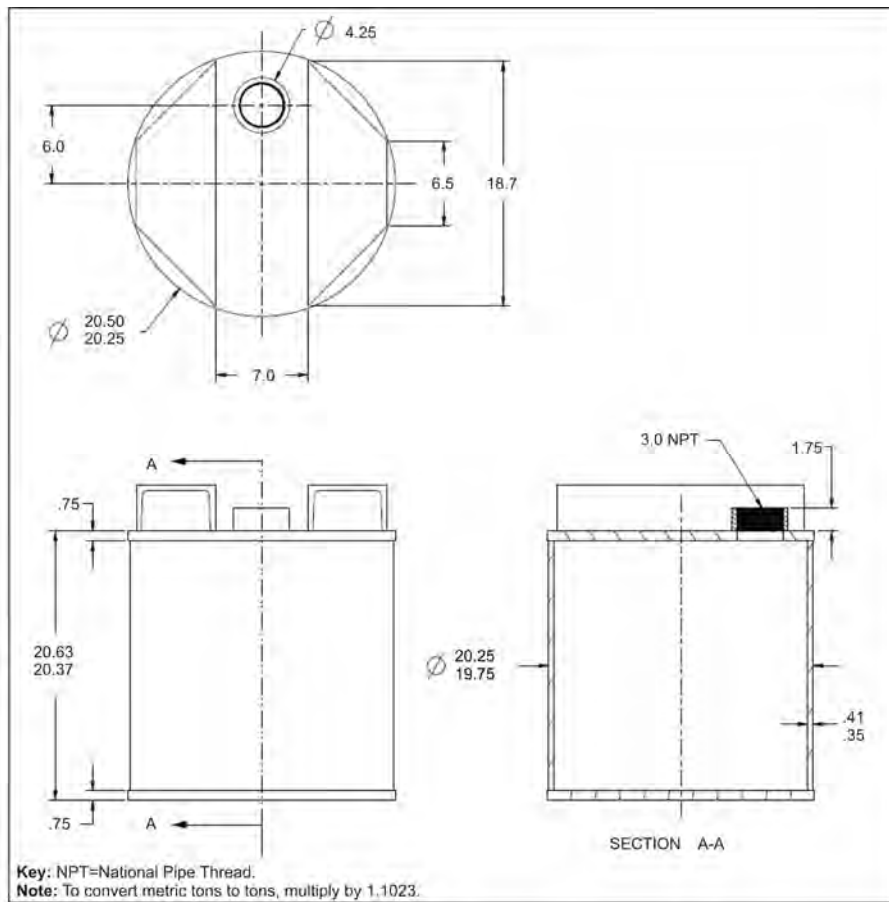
Dimensions of a Typical 1-Metric-Ton Container (inches)
